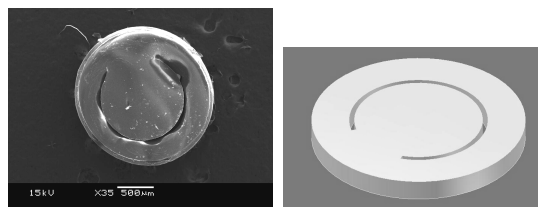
SEM and CAD images of the cantilever valve (0.2 mm in thickness).
